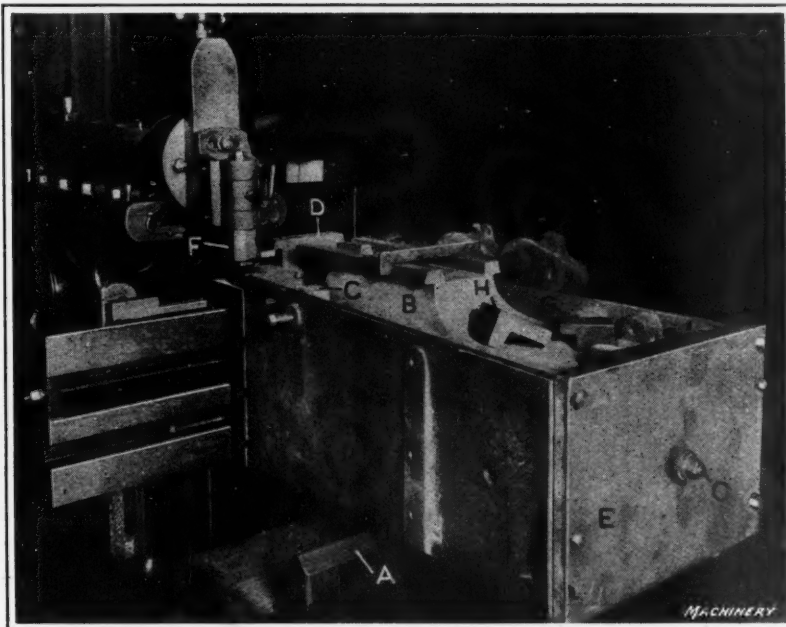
Shaper equipped with Special Fixture for planing Heavy Castings
